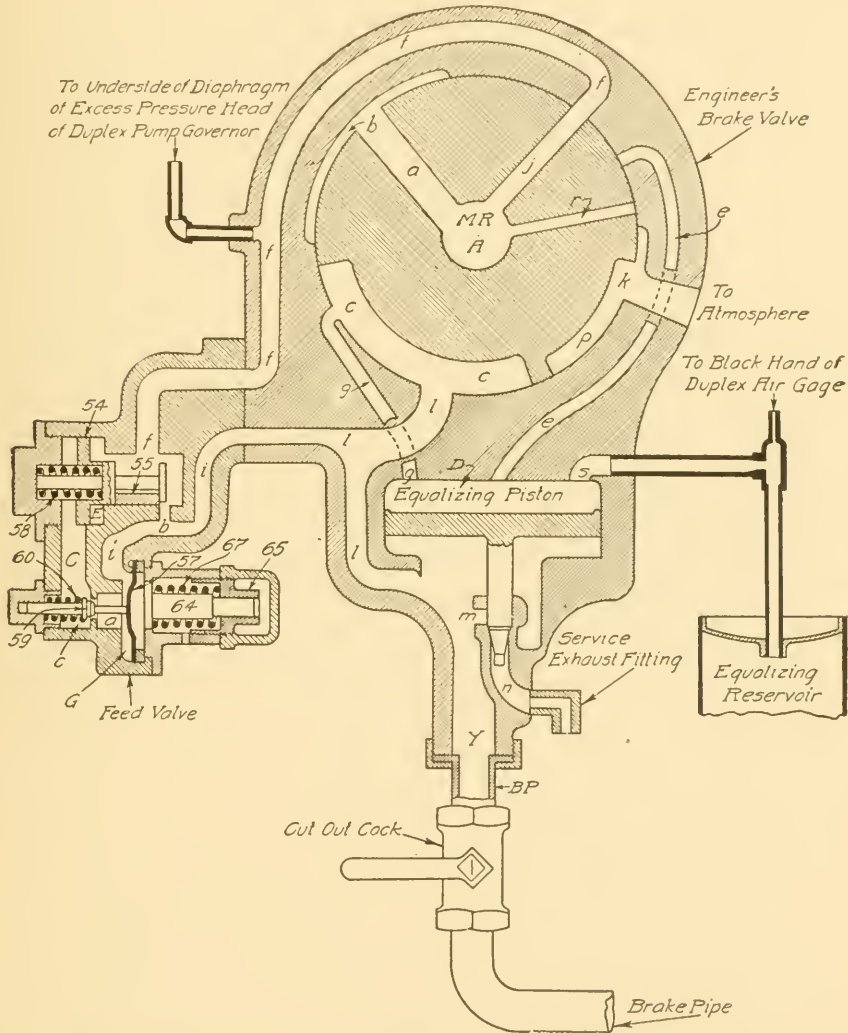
Horizontal Section of Westinghouse Brake Valve, Showing Running Position
